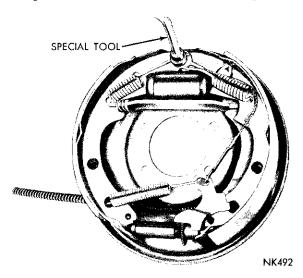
Removing or Installing the Brake Shoe Return Springs (Rear)
